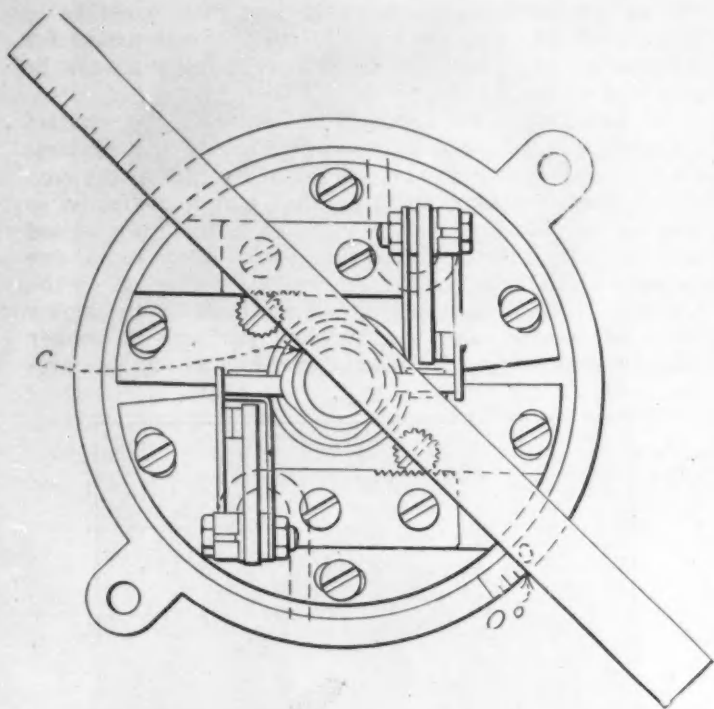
METHOD OF "TIMING" CONTACT SEPARATION IN PIVOTLESS BREAKER
